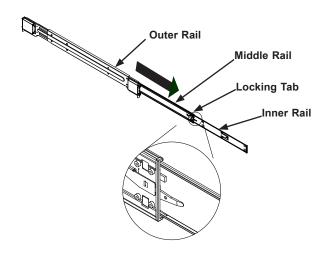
Identifying the Outer Rail, Middle Rail and Inner Rail (Left Rail Assembly Shown)
